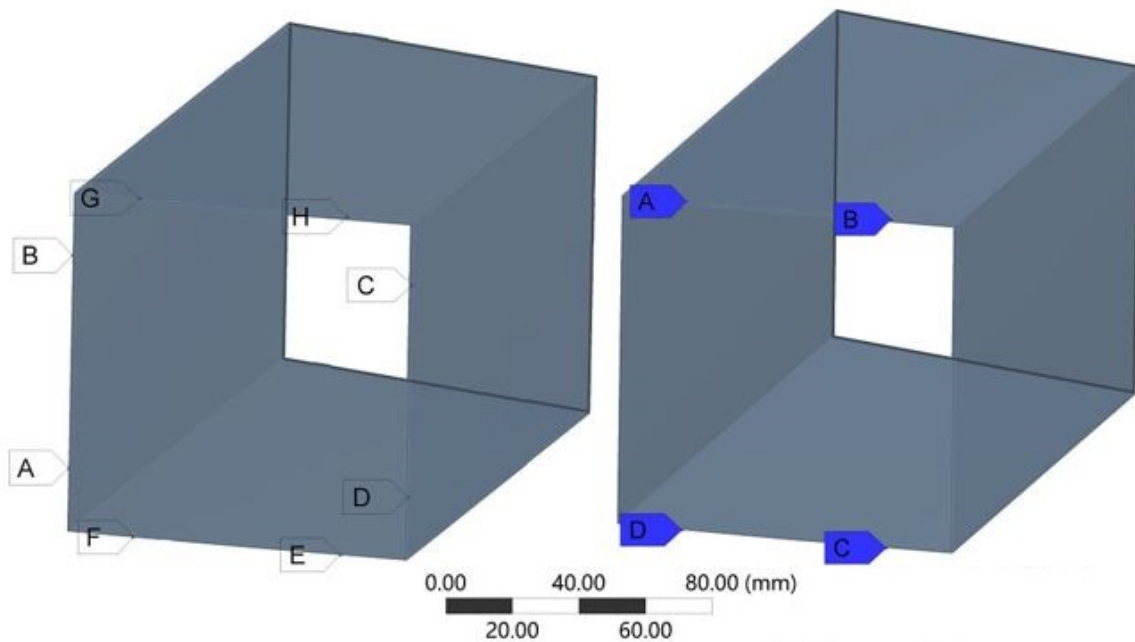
Connection method between welded full (Left) and welded T+B (Right)
